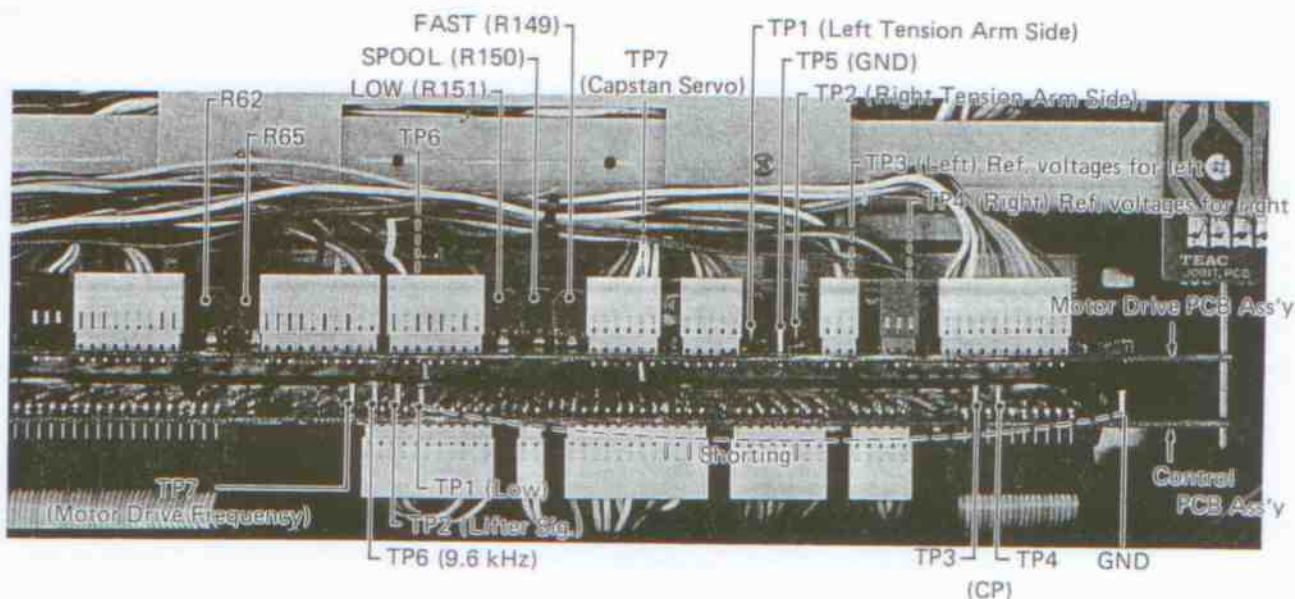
Control PCB Ass'y and Motor Drive PCB Ass'y
